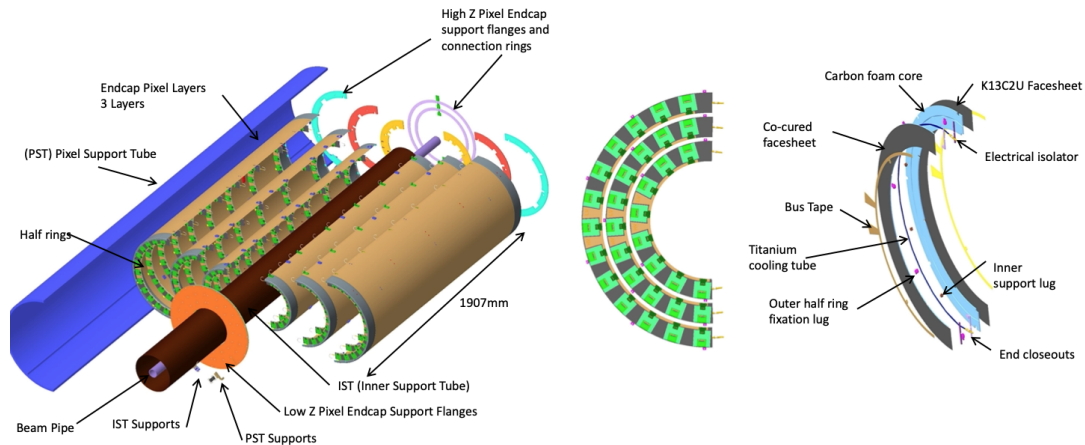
Left: full layout of one Outer Endcap, center: transverse view of one Outer Endcap where the three different Half-ring sizes are visible; right: exploded view of one Half-ring where all the components are visible.
